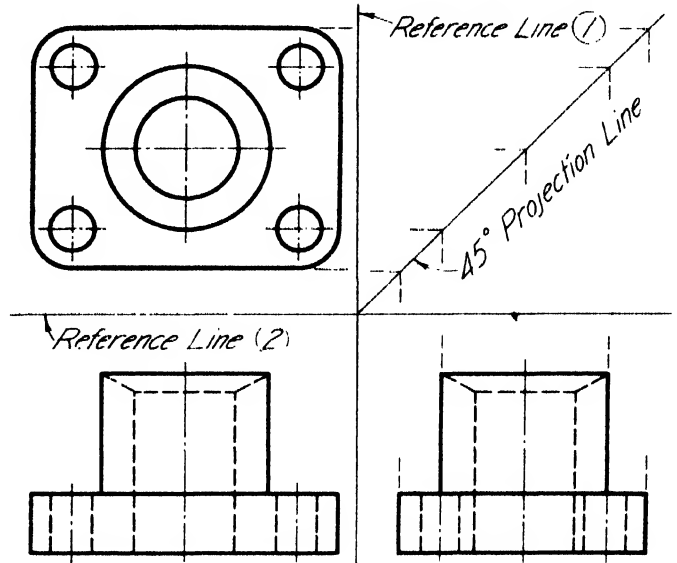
The same two view drawing with Reference Lines located and a third view derived by projection.
